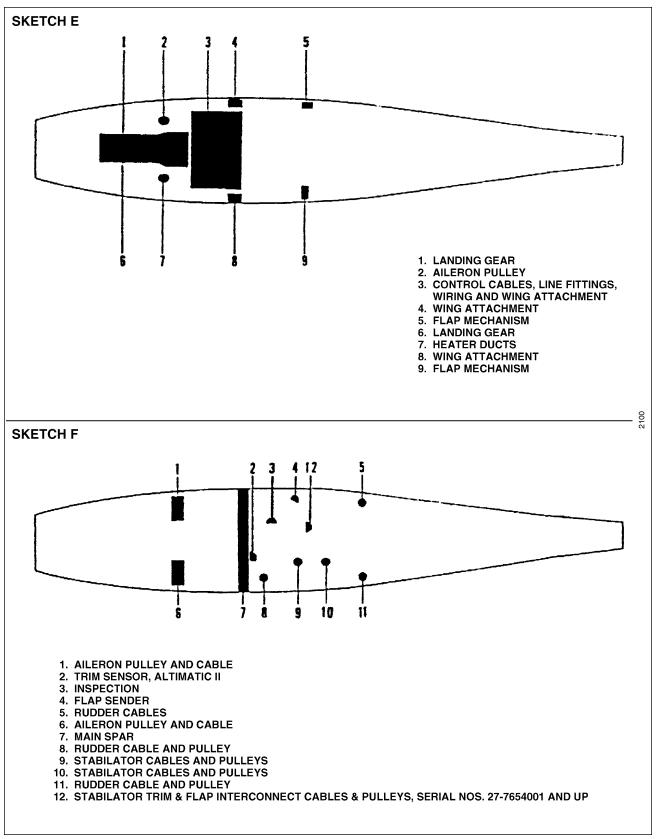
Access Plates and Panels PA-23-250 (six place) (Sheet 5 of 5)
